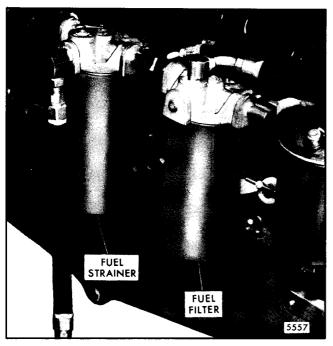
Typical Spin-On Type Fuel Strainer and Fuel Filter Mounting
